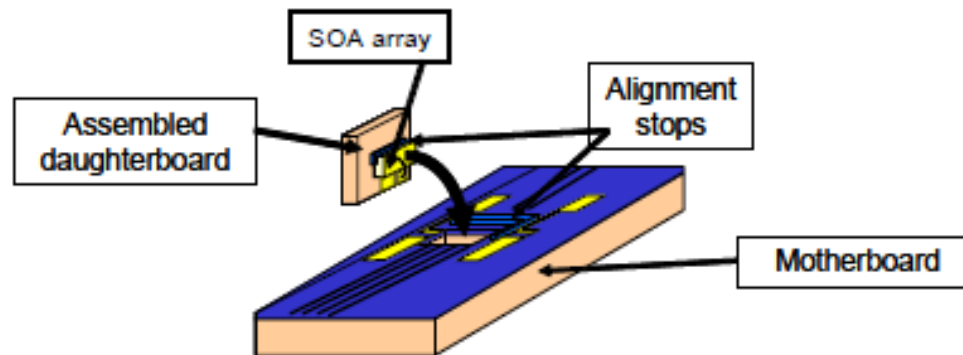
Schematic diagram of the CIP hybrid integration platform with passive assembly.
